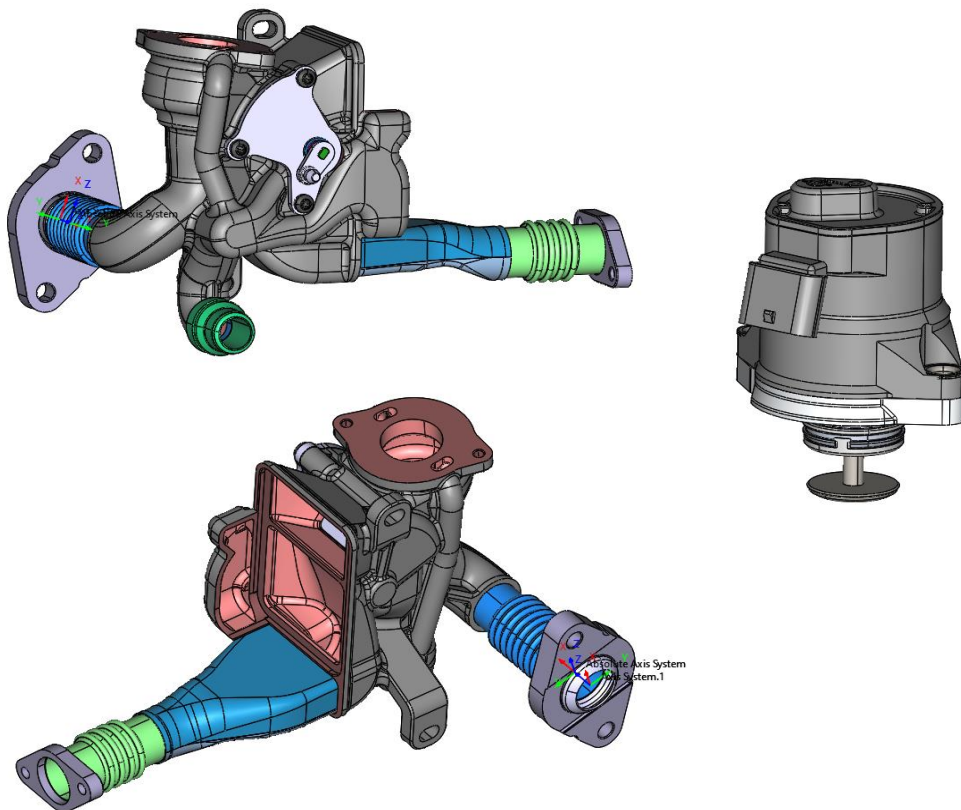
Inlet Casting, EGR Valve and Bypass Tube
